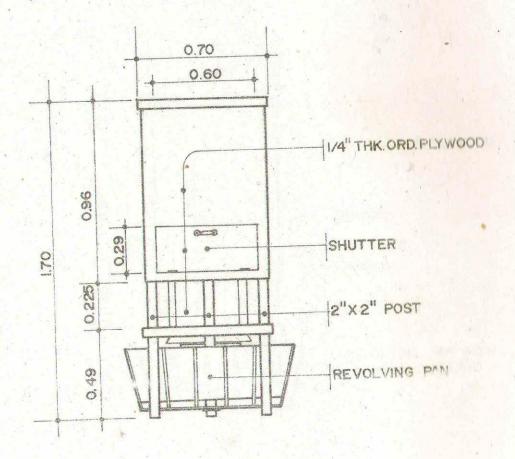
RIGHT SIDE ELEVATION Scale: 1:20 meter
